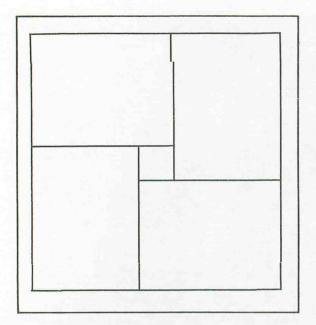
Glue four pieces of wood together as shown to make lamp "stem" with center hole. Plug holes on ends to mount on lathe.
